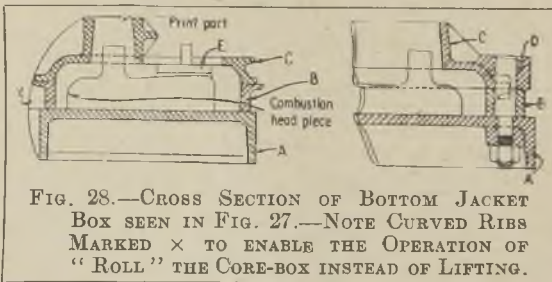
CROSS SECTION OF BOTTOM JACKET BOX SEEN IN FIG. 27.—NOTE CURVED RIBS MARKED X TO ENABLE THE OPERATION OF "ROLL" THE CORE-BOX INSTEAD OF LIFTING.
